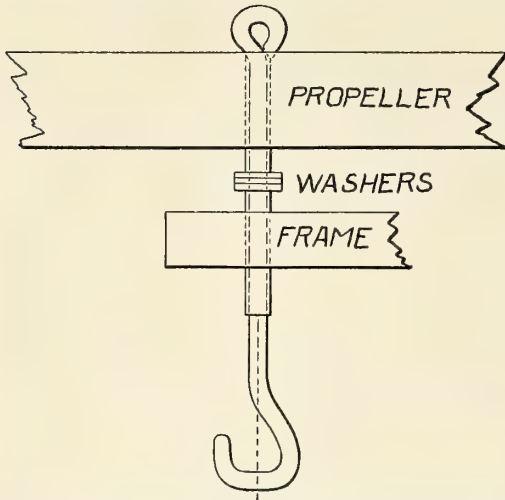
SHOWING CONSTRUCTION AND MOUNTING OF PROPELLER AND AXLE.
